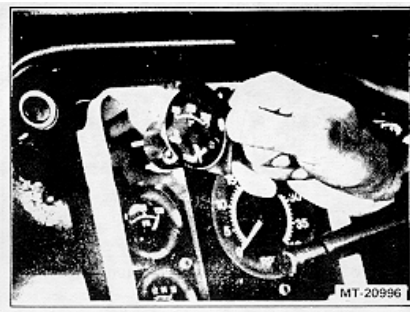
Removing Electrically Actuated Water Temperature Gauge
